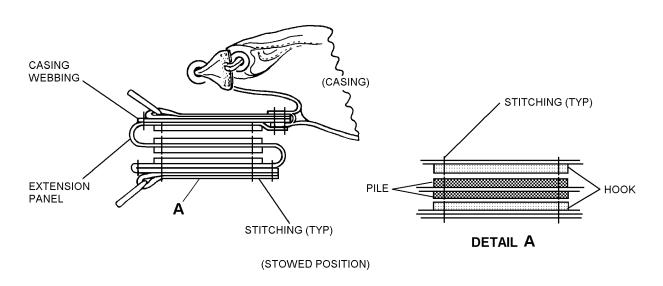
B. Casing Assembly Extension Panel Dimensions
